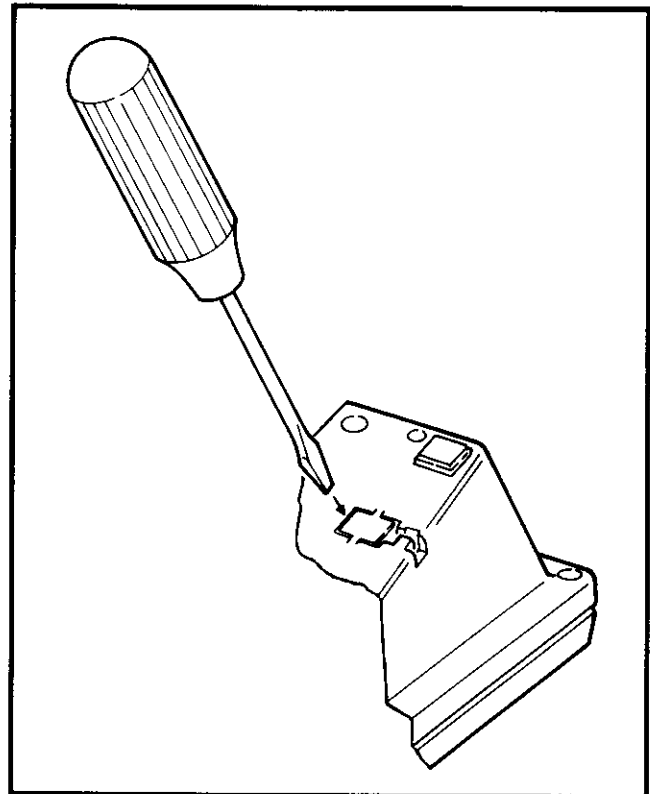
REMOVAL OF HHEU MODULAR CONNECTOR ACCESS TAB
